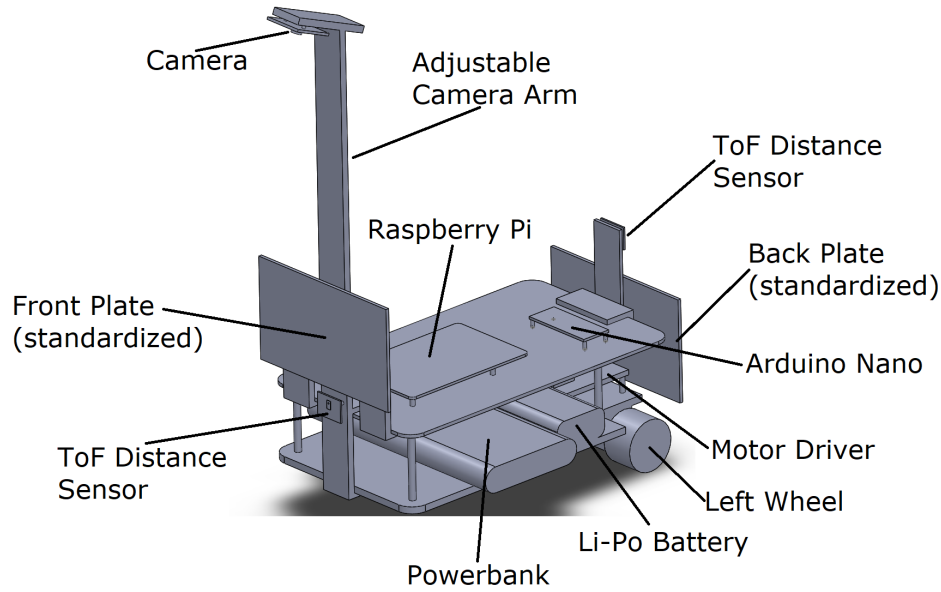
Isometric view of the 3D Drawing of the Vehicle
